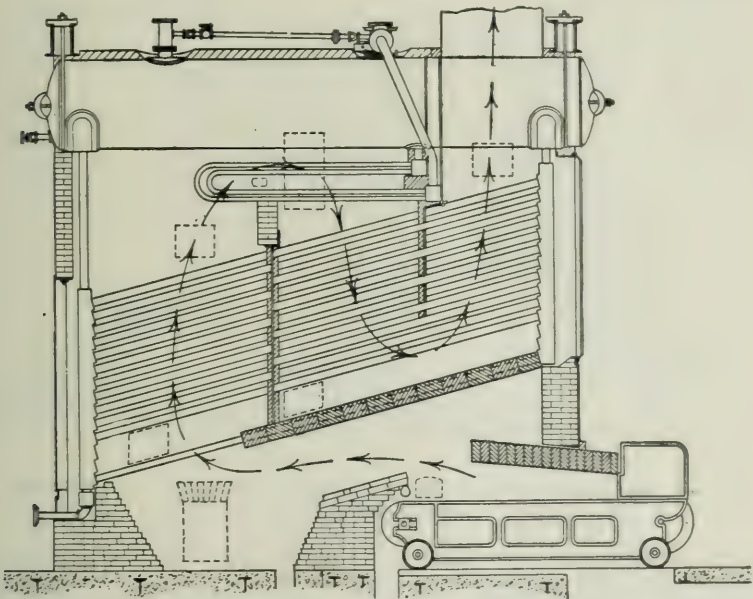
Improved Boiler No. 10 with tile furnace roof which prevents gases coming directly in contact with tubes, and insures complete and smokeless combustion.
